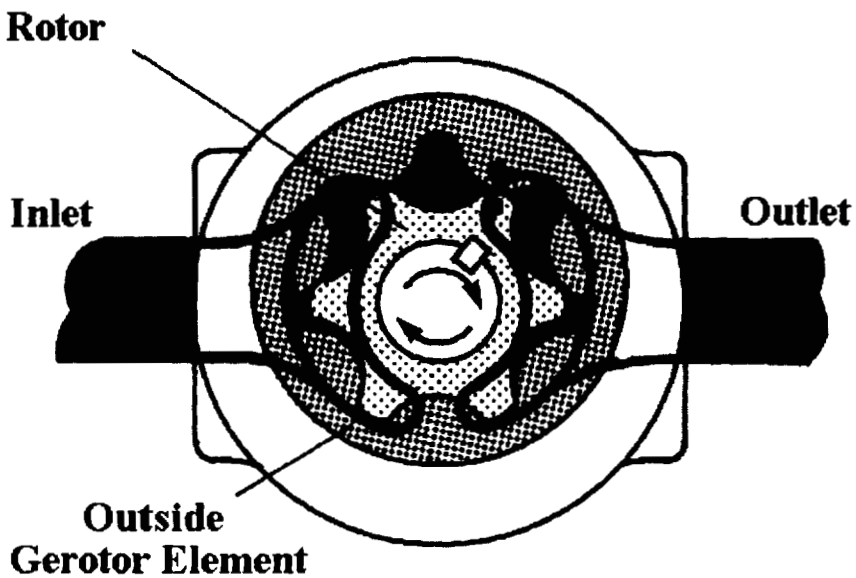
Illustration of an internal (gerotor) gear pump.
